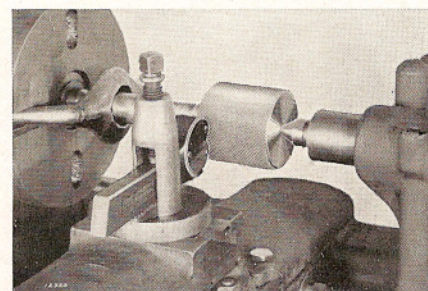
Knurling Large Handle Mounted Between Centers in the Lathe.
